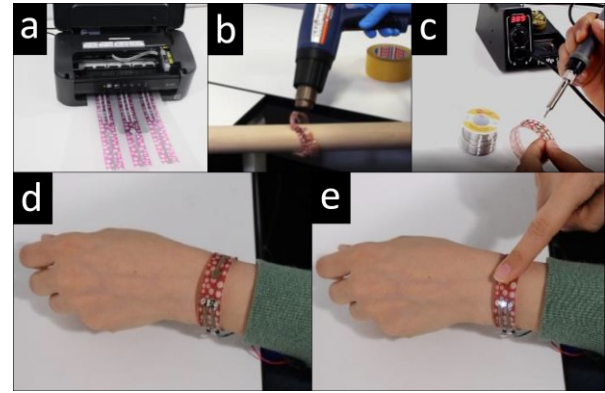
Thermoplastic inkjet-printed e-bracelet: (a) Printing on shrink film, (b) re-shaping with heat gun, (c) soldering of the LED, (d-e) final prototype.
